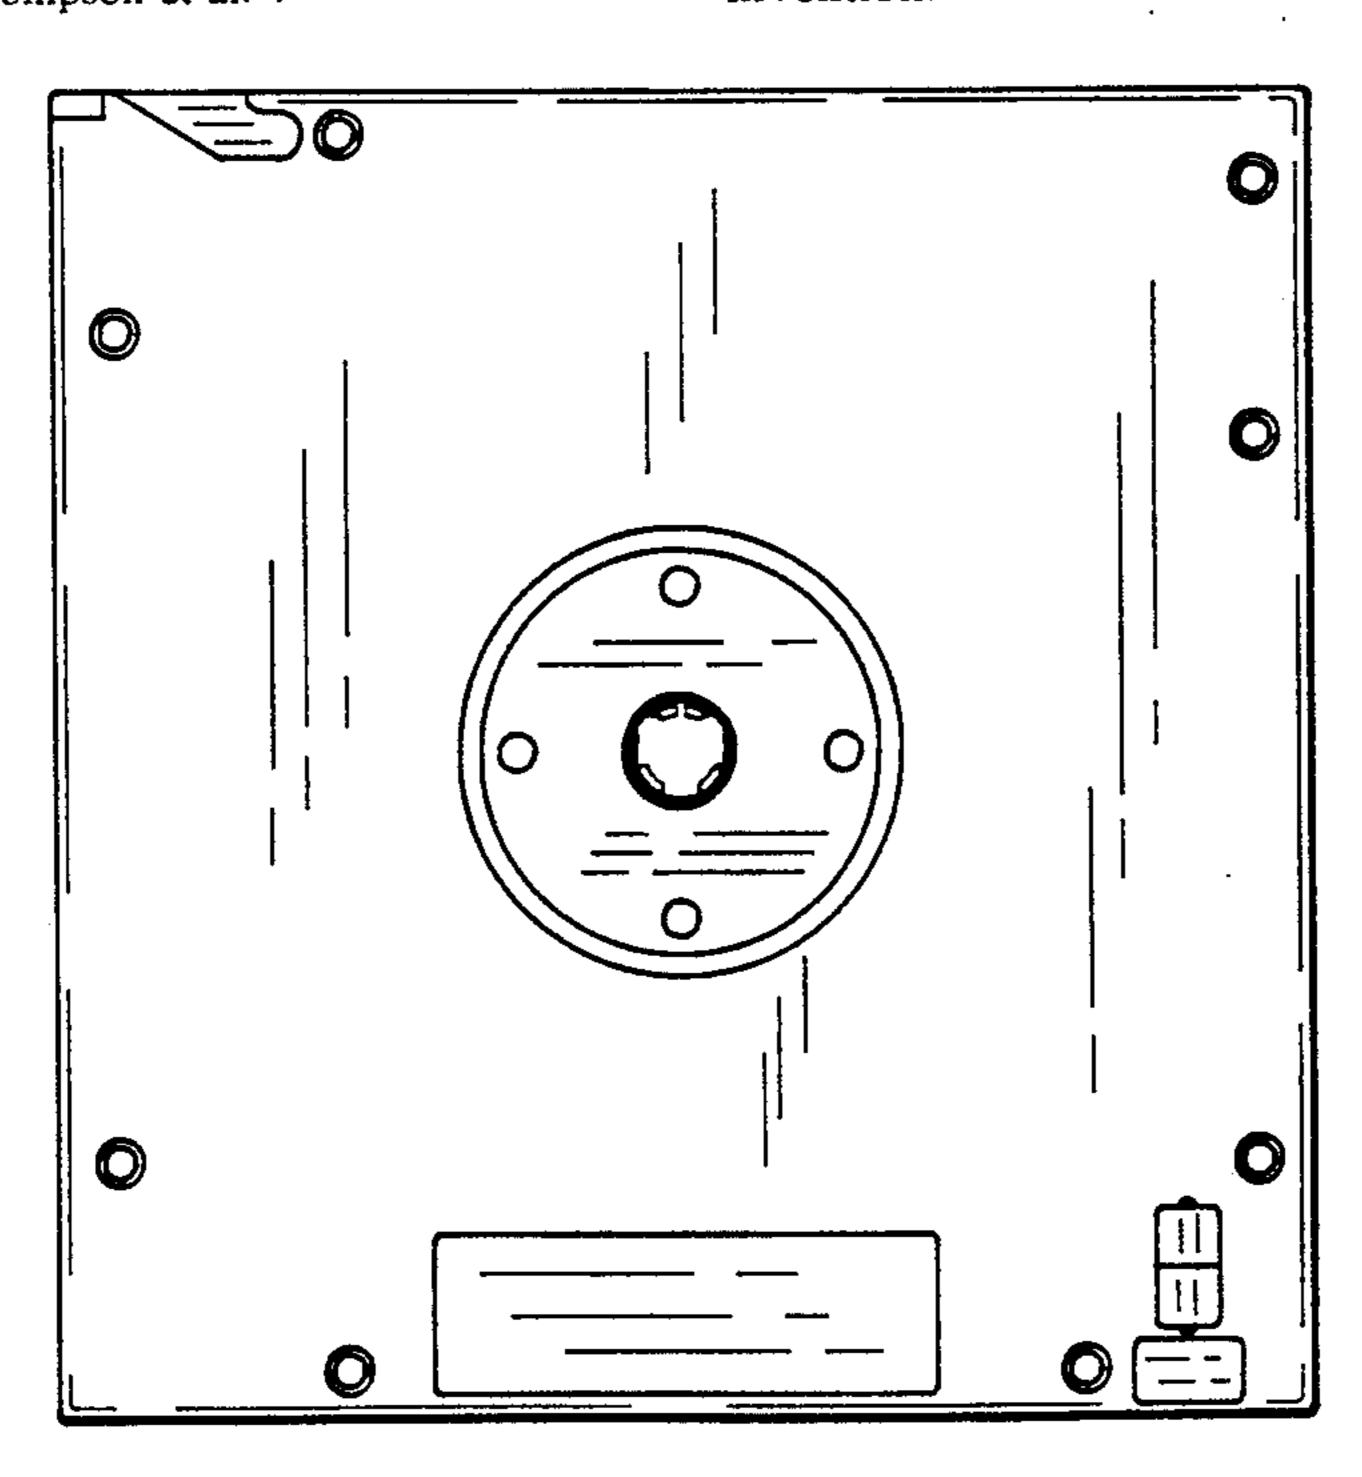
depicts a front side view of the removable cartridge with a $2\frac{1}{2}$ inch form factor for a disk drive of the invention;
